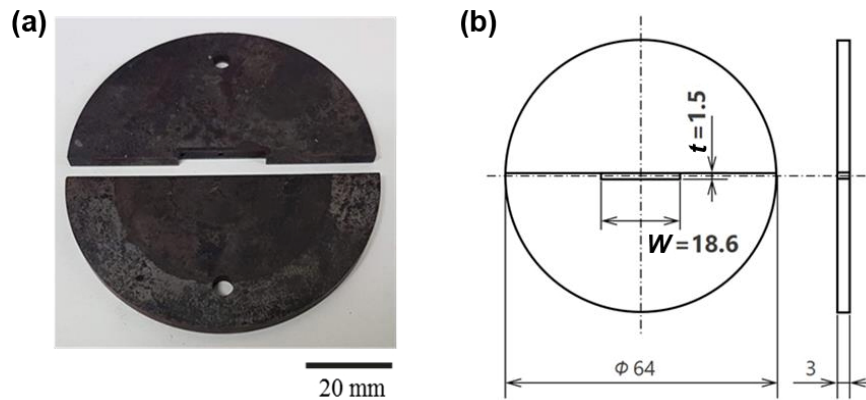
Shape of segmented die ((a) picture and (b) design).
